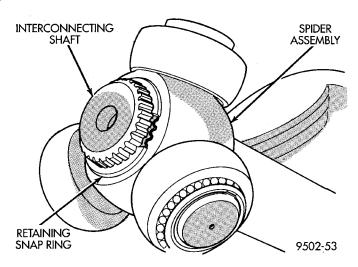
Spider Assembly Retaining Snap Ring Installed
